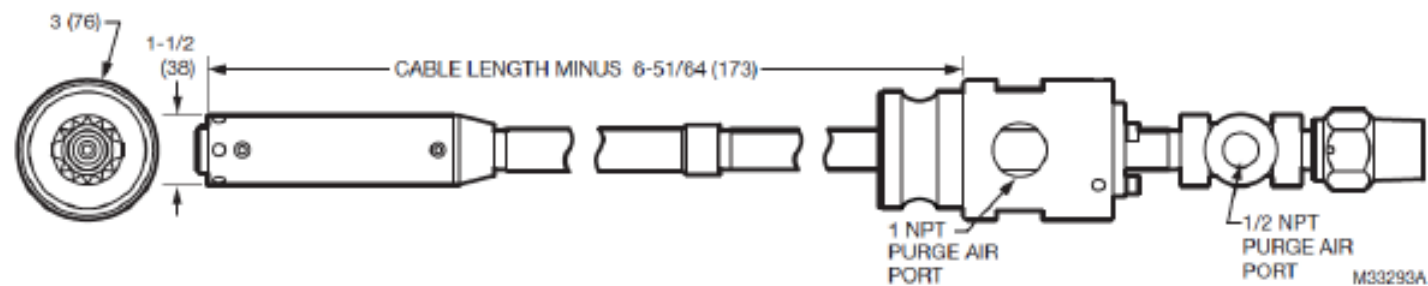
Inner carrier assembly example (dimensions in in. [mm]).
